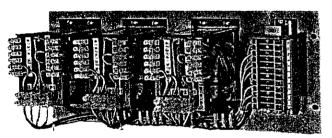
Auxiliary CT set for one winding mounted on a 4S (7" high) 19" apparatus plate.
